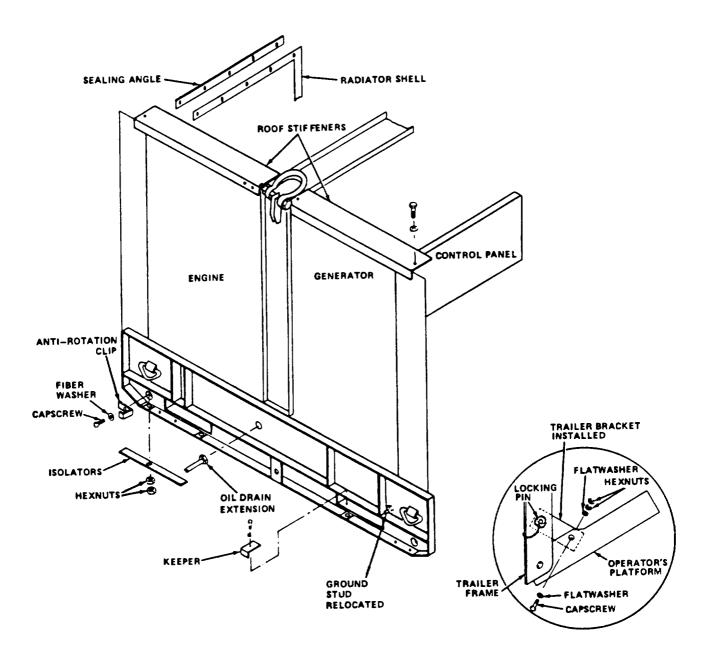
Roof Stiffeners, Sealing Angle, Oil Drain, Isolators, Bottom Panel Tray Assembly, and Trailer Brackets
